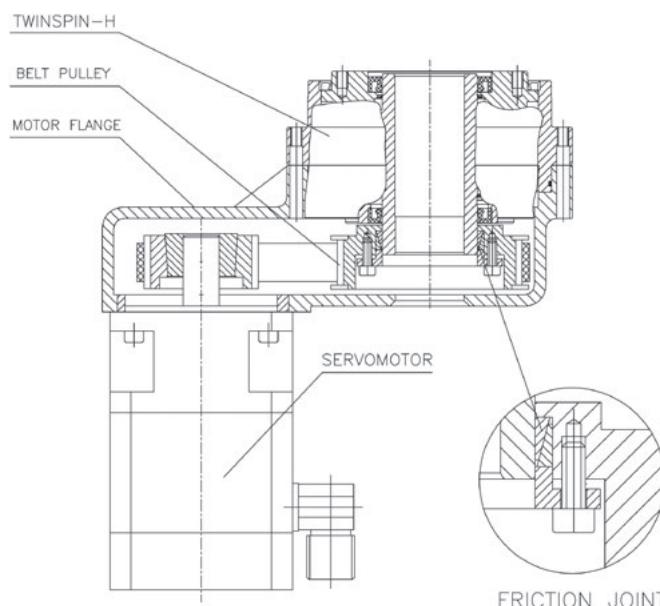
Connection of a toothed pulley with the reduction gear shaft by means of a friction connection
